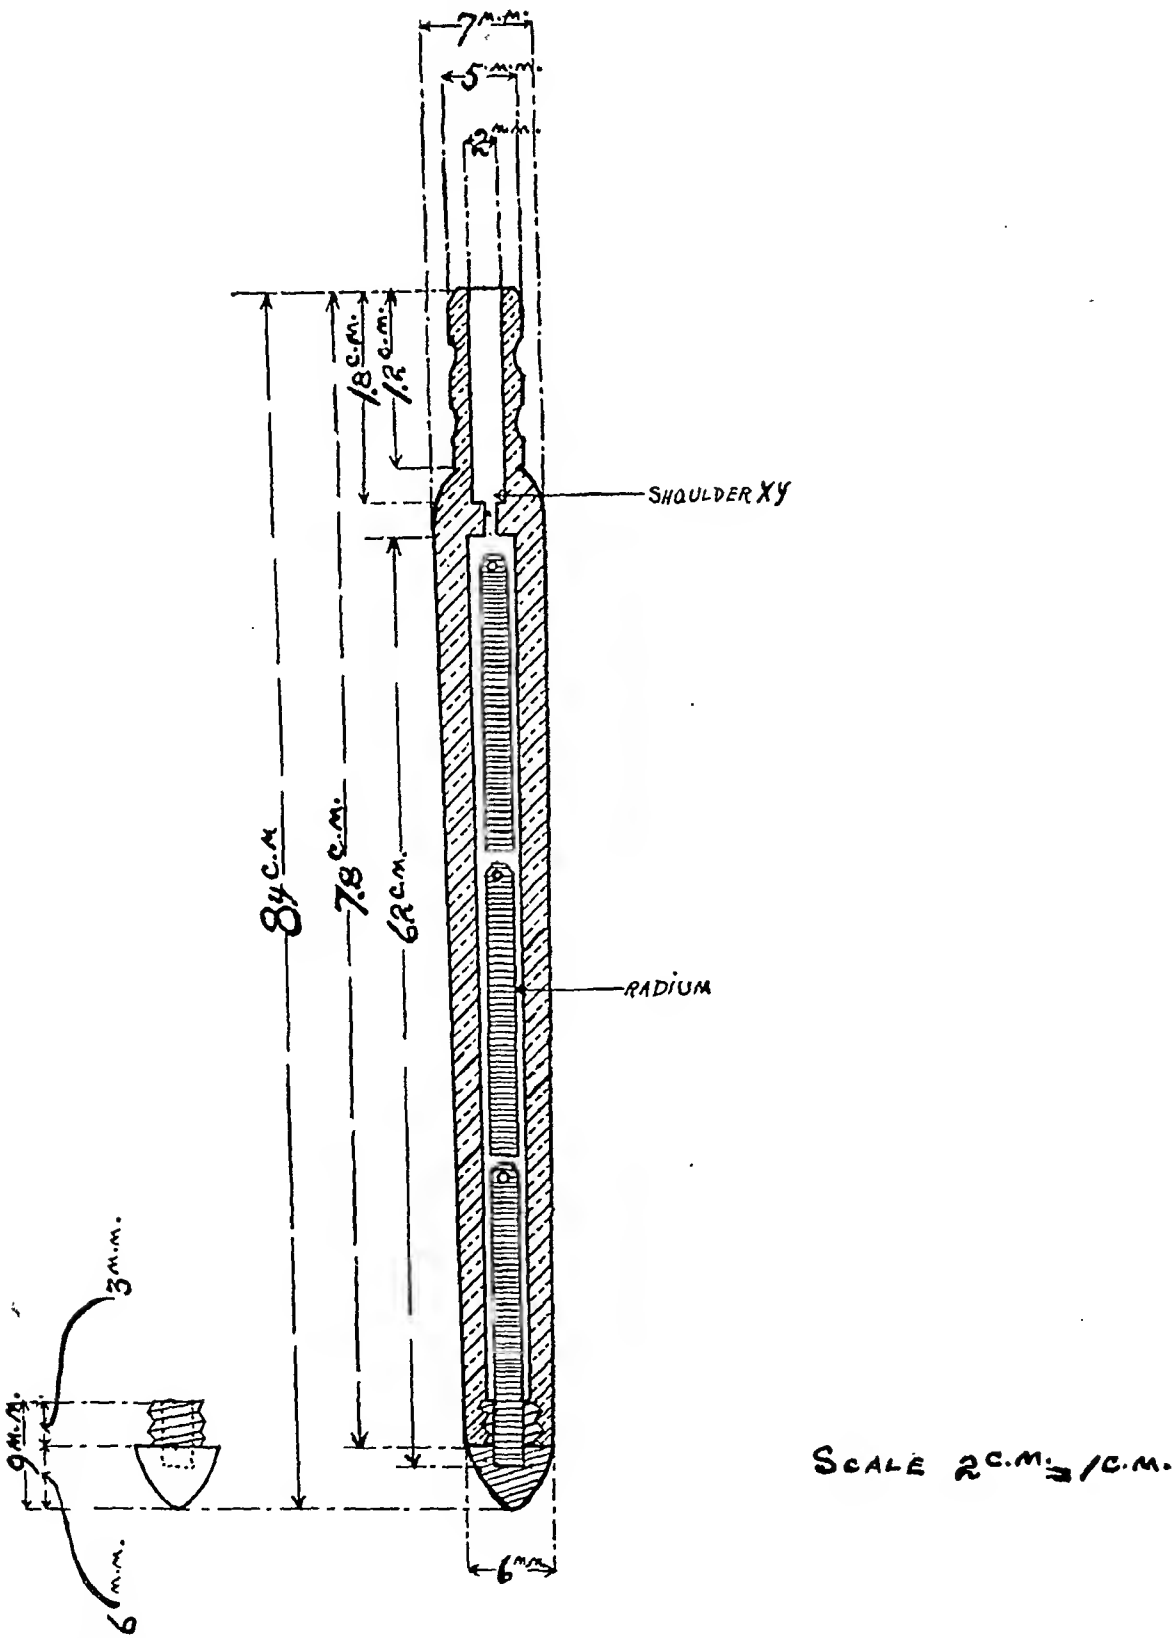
Mechanical drawing of the three-tube radium capsule. XY is the shoulder through which the fishing cord passes and is held intact by means of a knot tied on the inner end.
